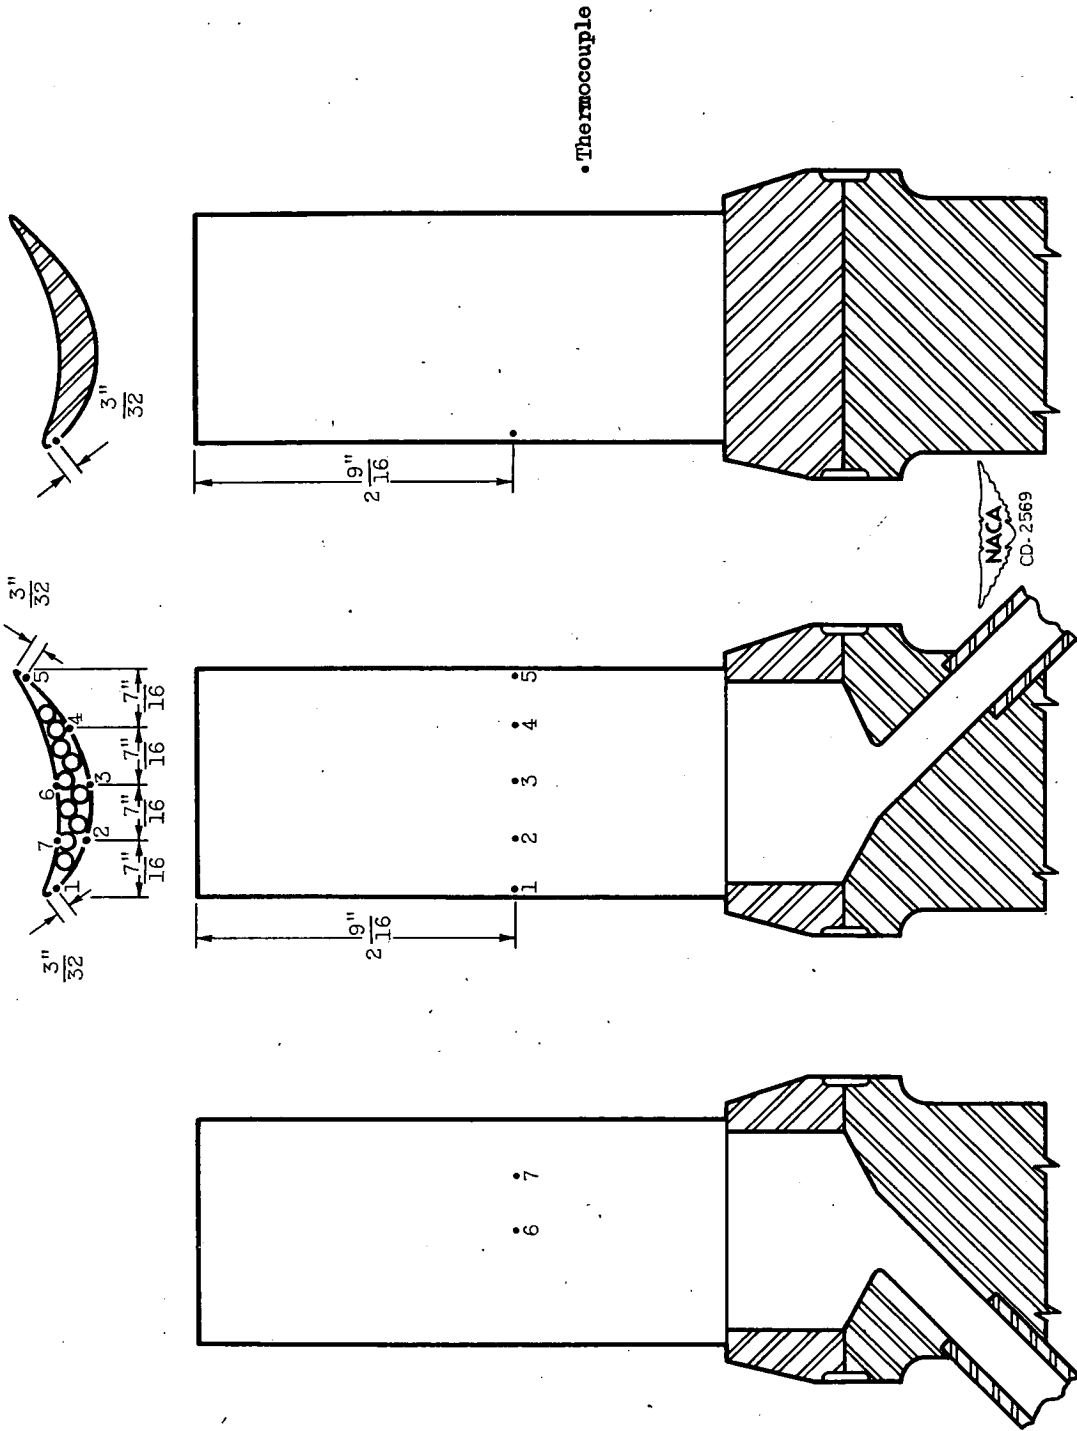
Construction details of typical formed-shell blade utilizing brazed shell-to-base attachment.
